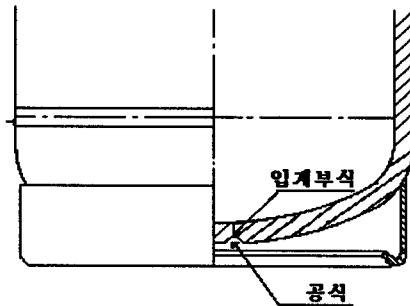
Localized corrosion on bottom of LPG cylinder.
